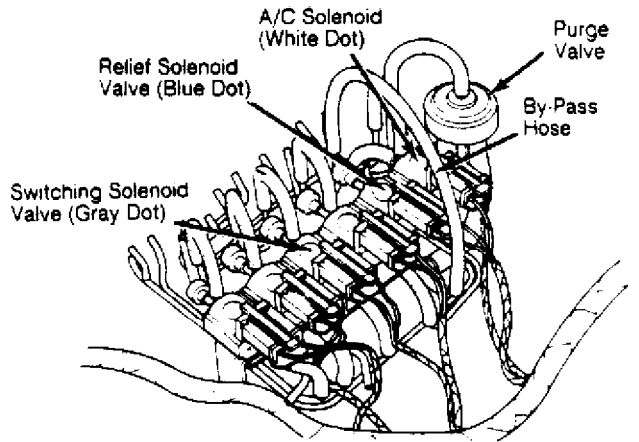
Hose Arrangement for Checking Air Control Valve Operation
